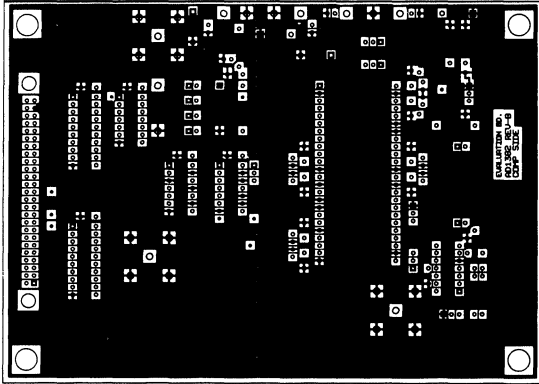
AD1382 Evaluation Board Layout, Layer 1 (Component Side)
